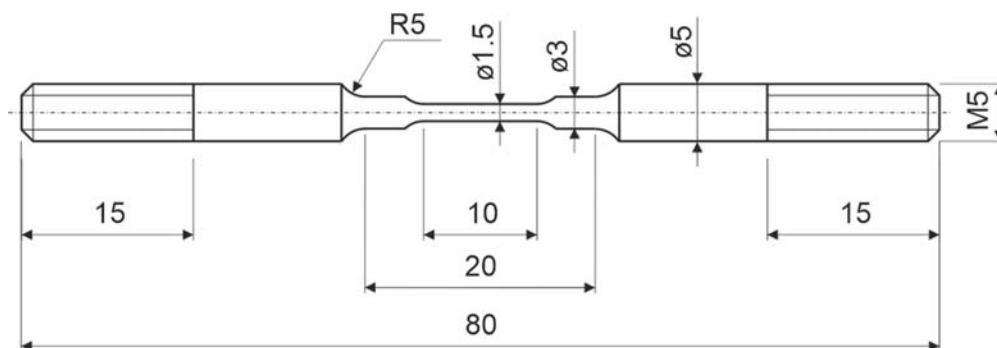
Geometry of round tensile specimen; machined with tensile axis parallel to the rolling direction of the steel plate (all dimensions in mm).
